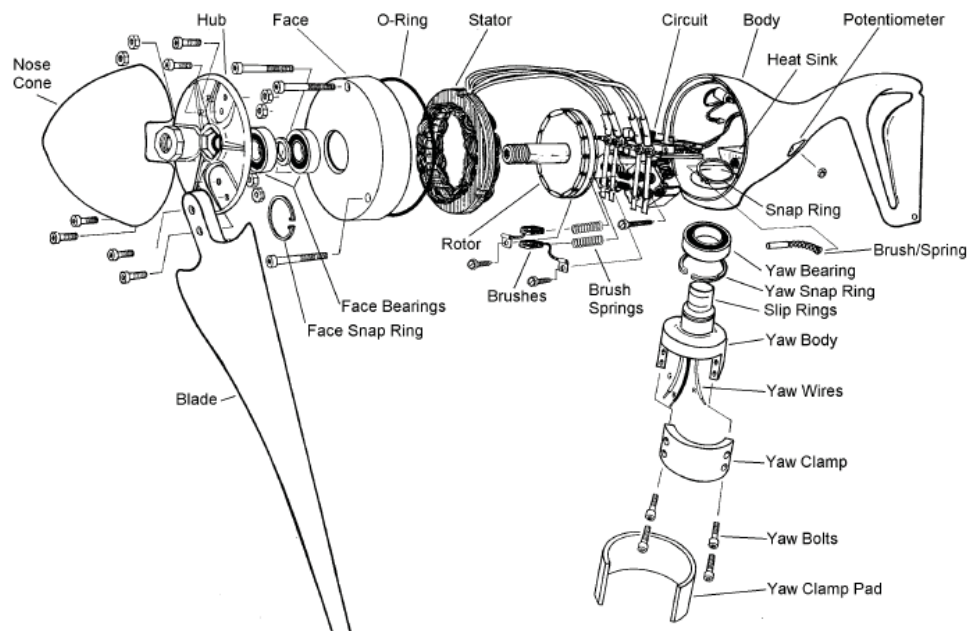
Exploded view of the Air X marine wind turbine [60]
